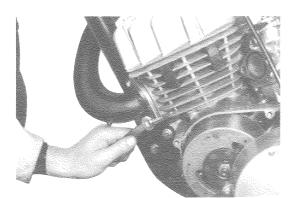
Unscrewing exhaust pipe fitting bolt
